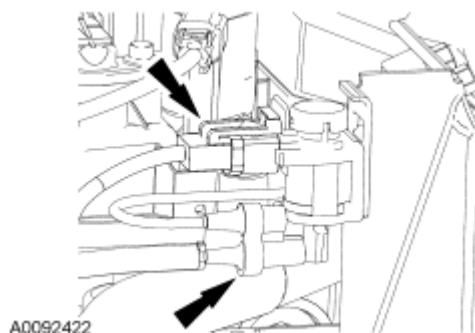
Locating Secondary Air Injection Vacuum Regulator Electrical Connector And Vacuum Hose
